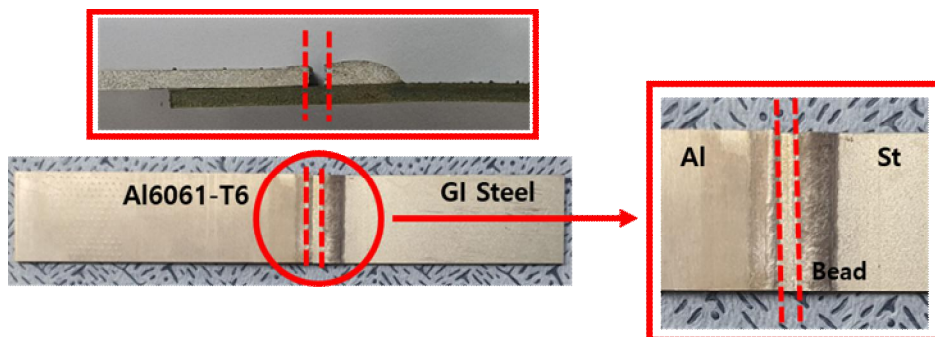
Welded specimen fractured after tensile-shear load test
